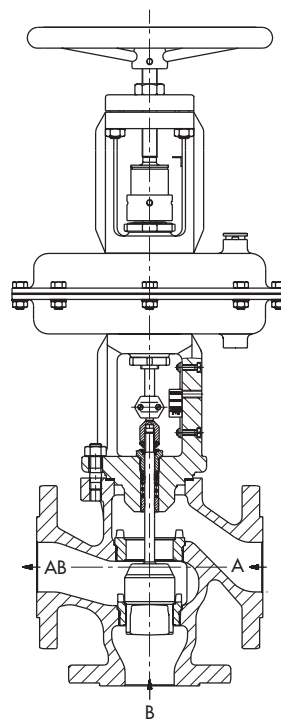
· Type 3244/3271 Pneumatic Control Valve consisting of Type 3244 Three-way Valve (plug arrangement for mixing service and Type 3271 Pneumatic Actuator (with top mounted hand-wheel)
